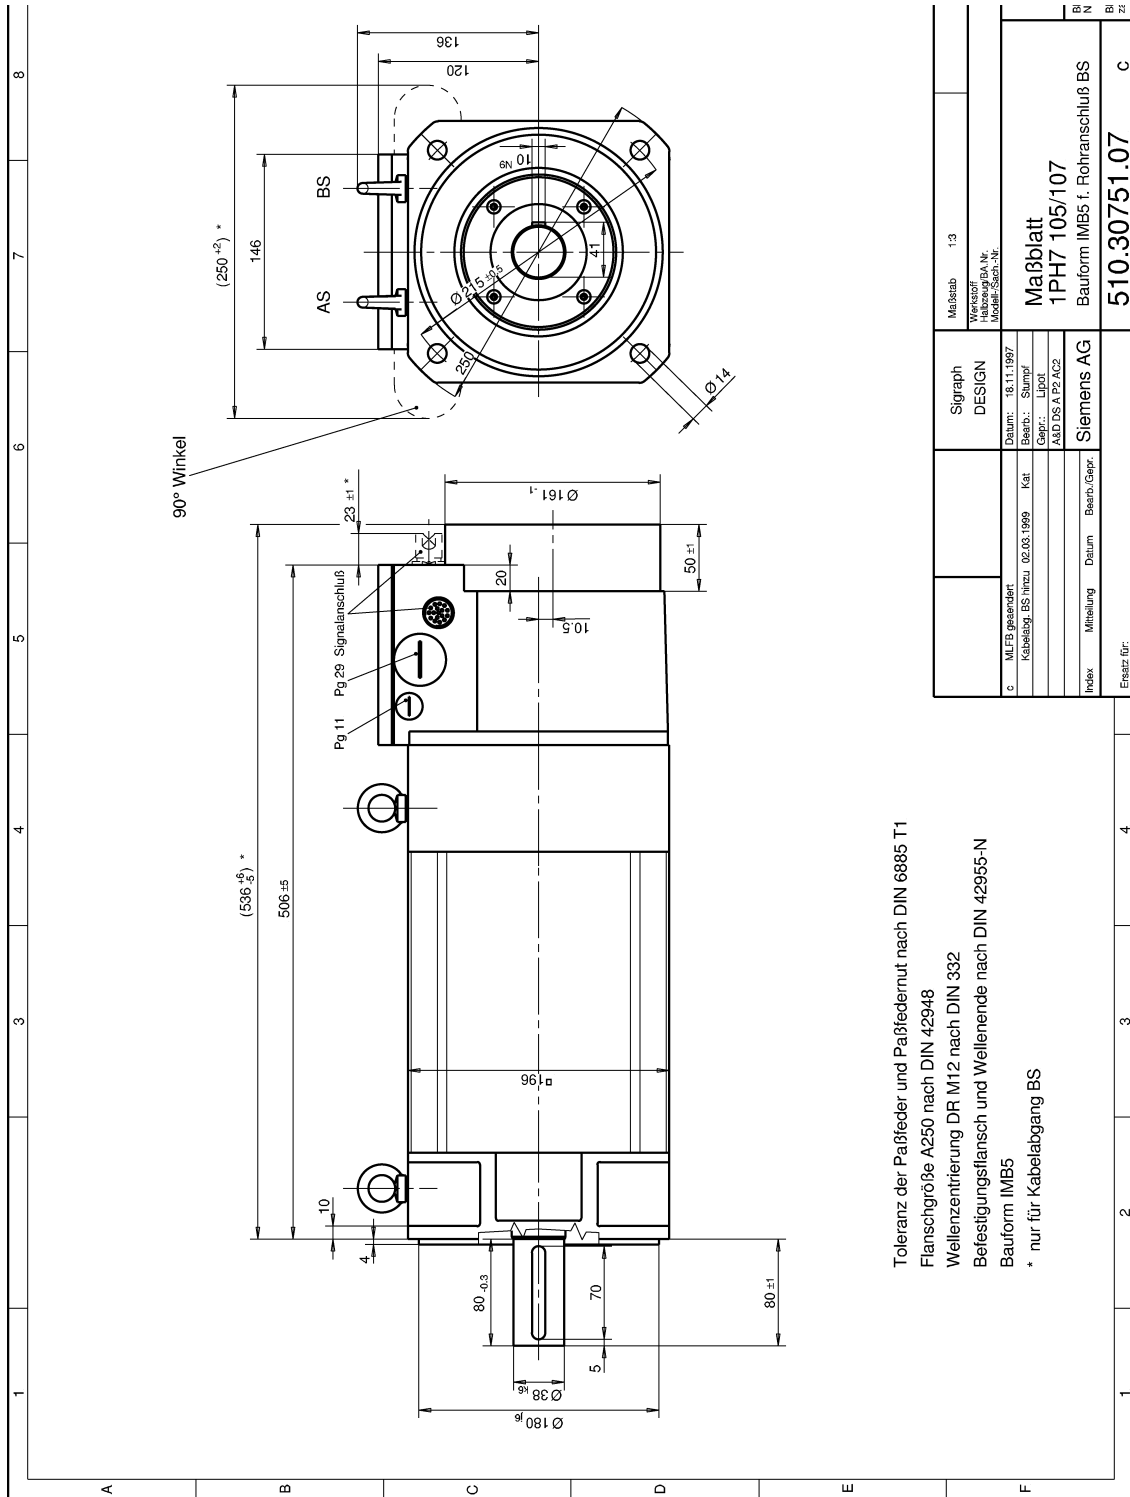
1PH7105 to 1PH7107, IM B5 with pipe connection
